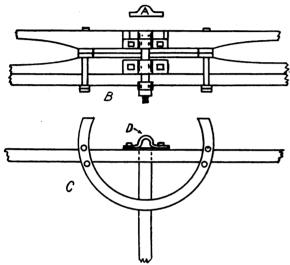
FRONT ELEVATION AND TOP PLAN VIEW, SHOWING KING BOLT ARRANGEMENT.
